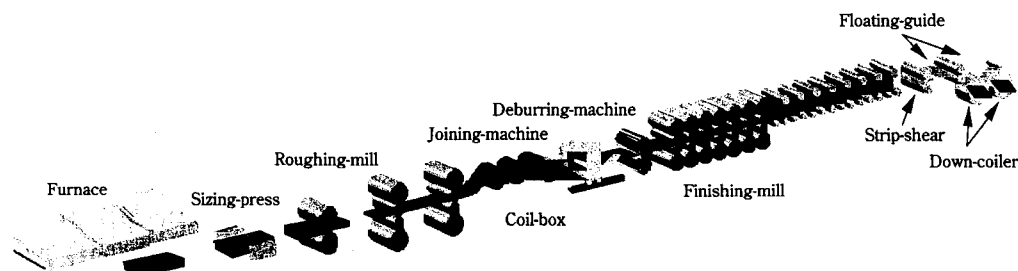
Layout for endless rolling in Chiba Works No. 3 hot strip mill
